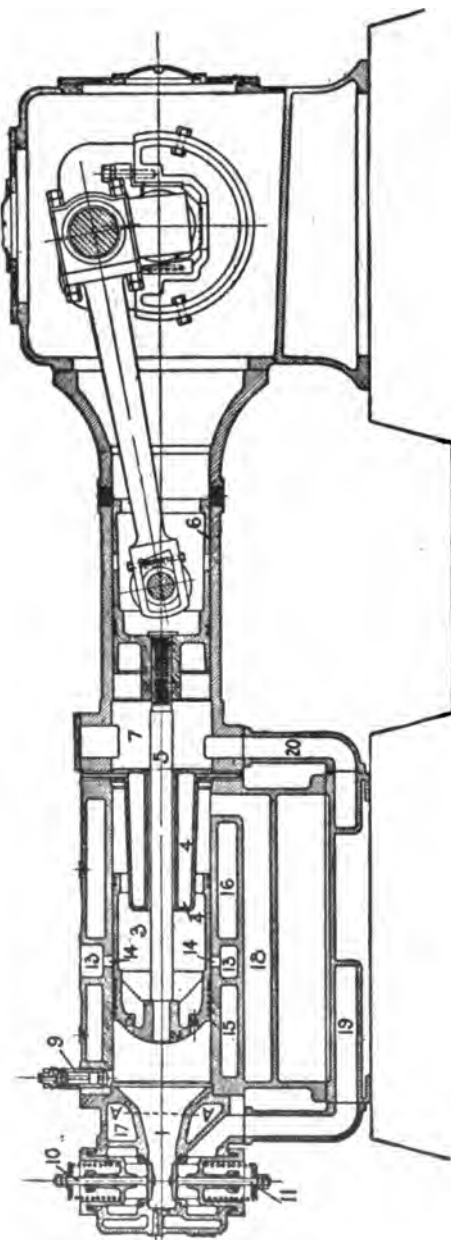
Section of Buckeye Two-cycle Engine.
